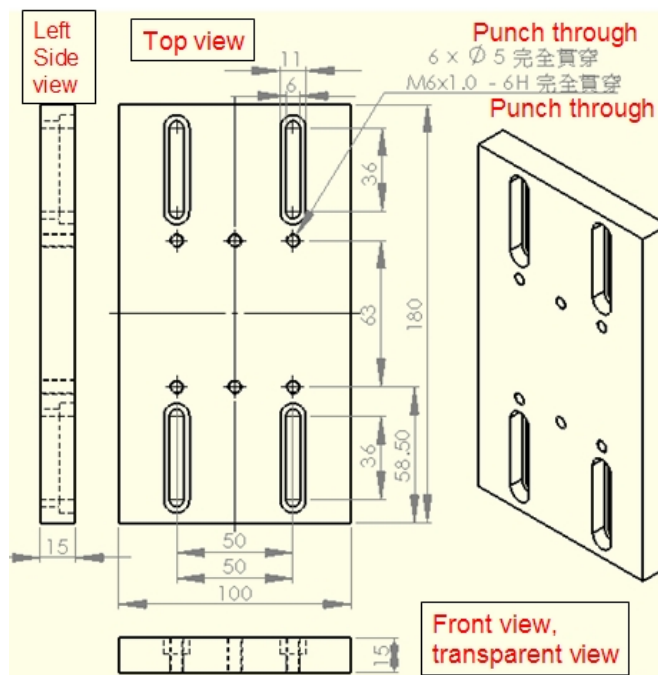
Engineering drawings for the bottom plate in the left part of Fig 51.
